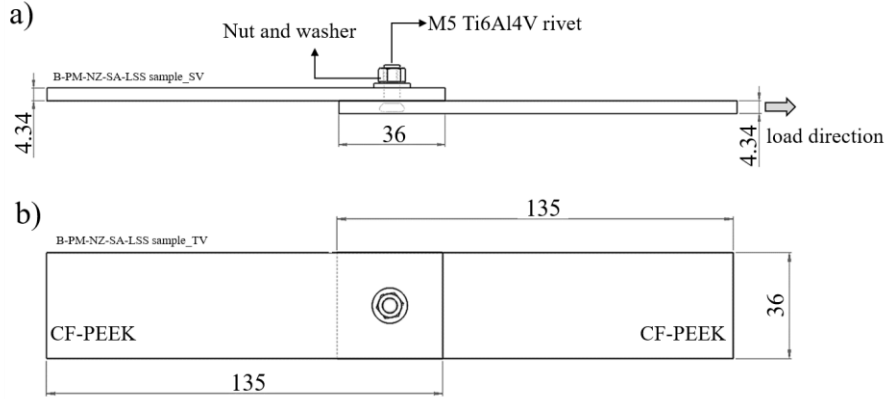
Geometry of friction riveted single lap joints: a) side and b) top views. All dimensions are in millimeters.
